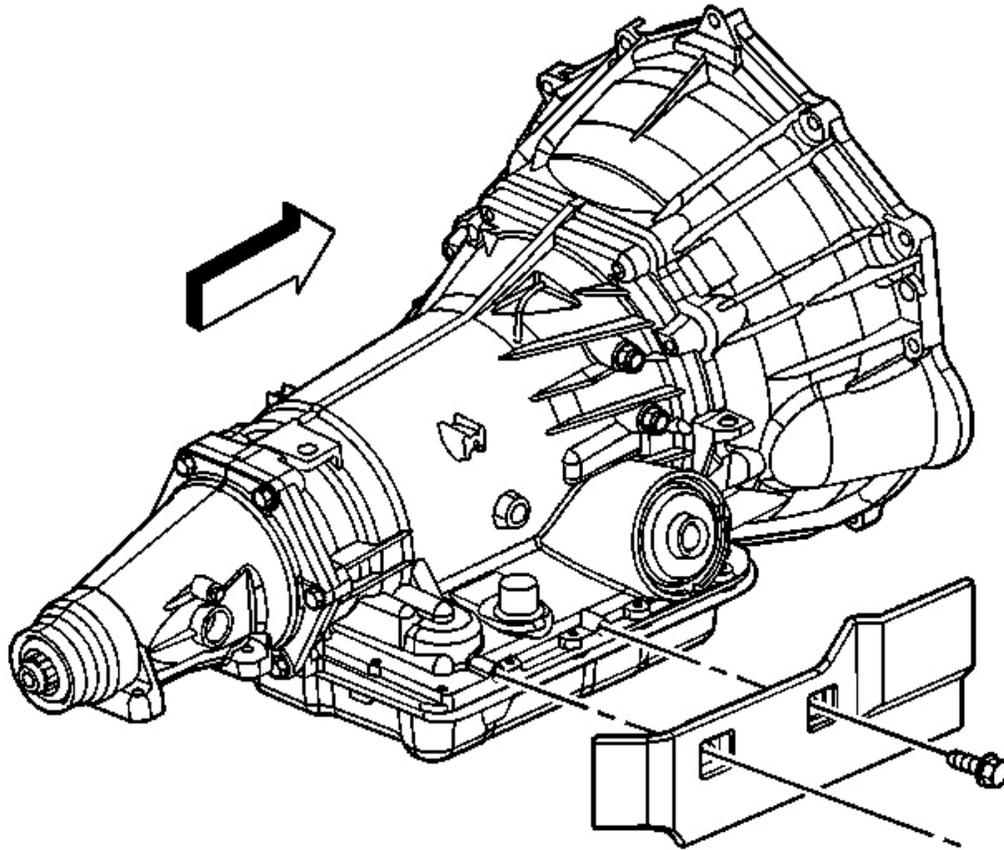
Transmission Heat Shield Bolts & Heat Shield
